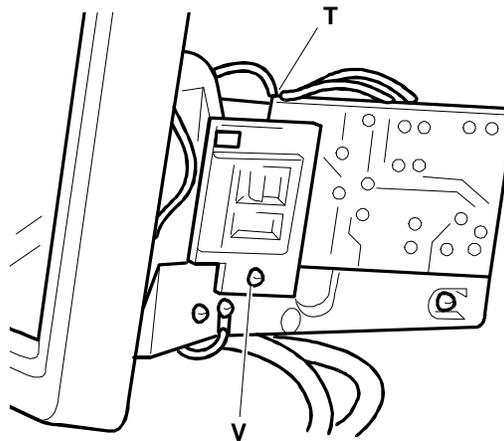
Removing the ON/OFF Switch and Contrast Assembly
